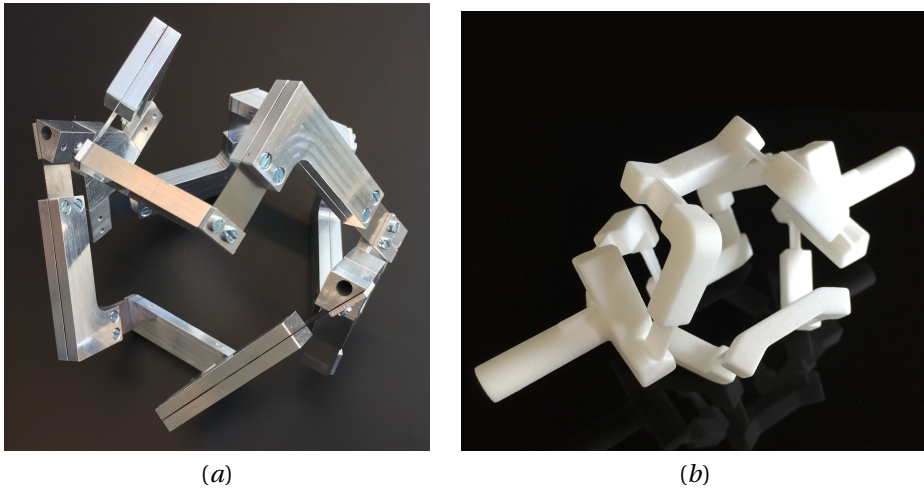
The prototypes of the fully compliant homokinetic coupling, compliant CV joint. (a) An Aluminum prototype fabricated for experimental evaluations, the rigid parts are fabricated out of Aluminum, and the flexures are cut out of austenitic stainless steel. (b) A single-piece demonstrator printed out of plastic.
